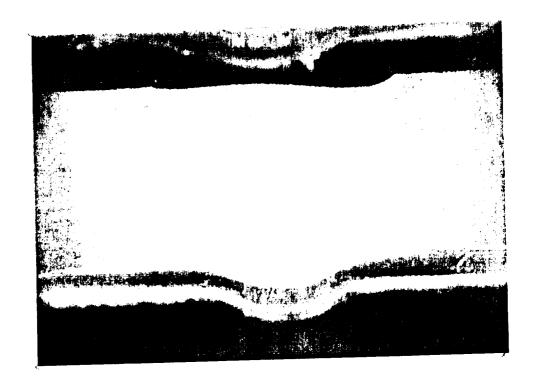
B Weld made with 520 ppm Oxygen in shield. Keyhole. Back.
